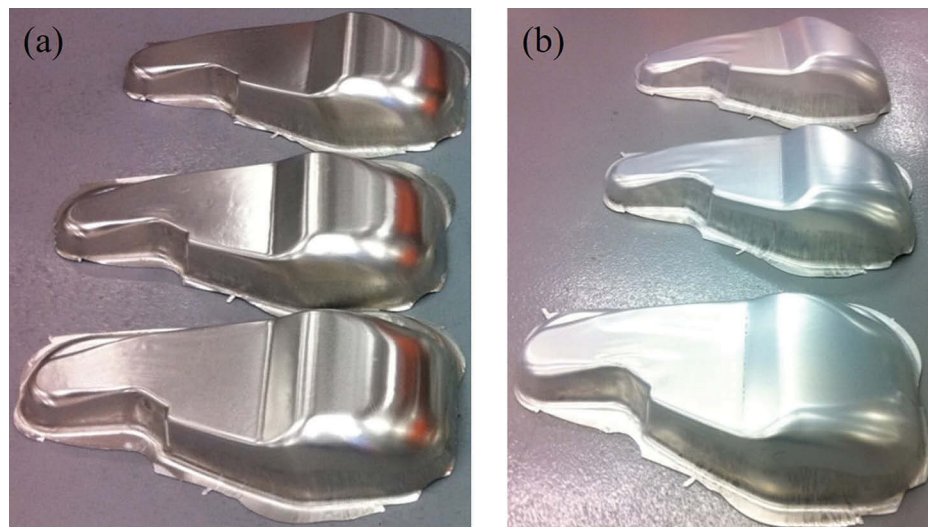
Vehicle bulkhead component formed from (a) AA6082 and (b) AA5754. Design and forming tool were supplied by Lotus Cars, UK
